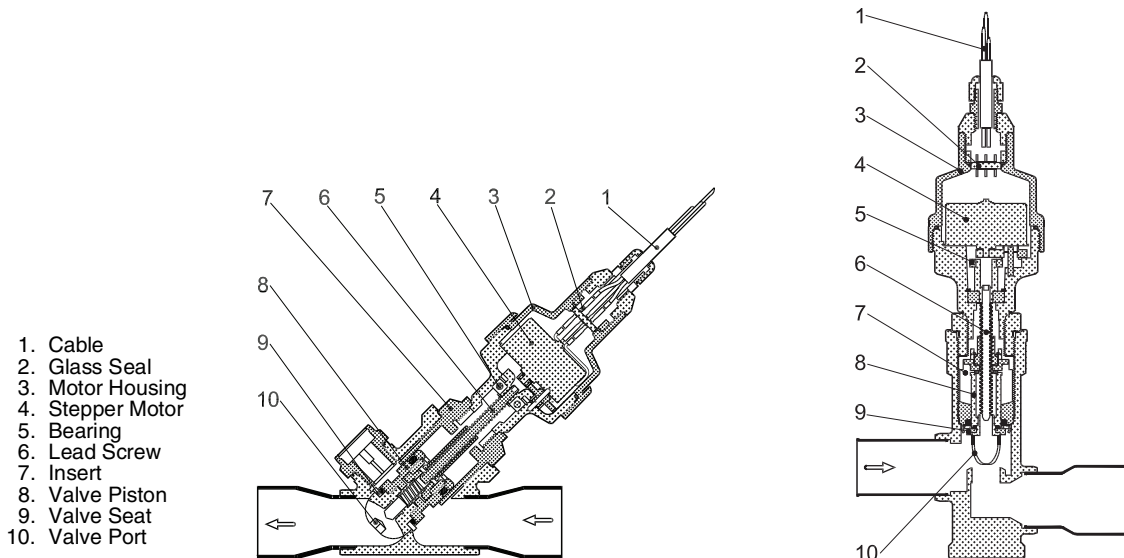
Cutaway Views of the Electronic Expansion Valve
